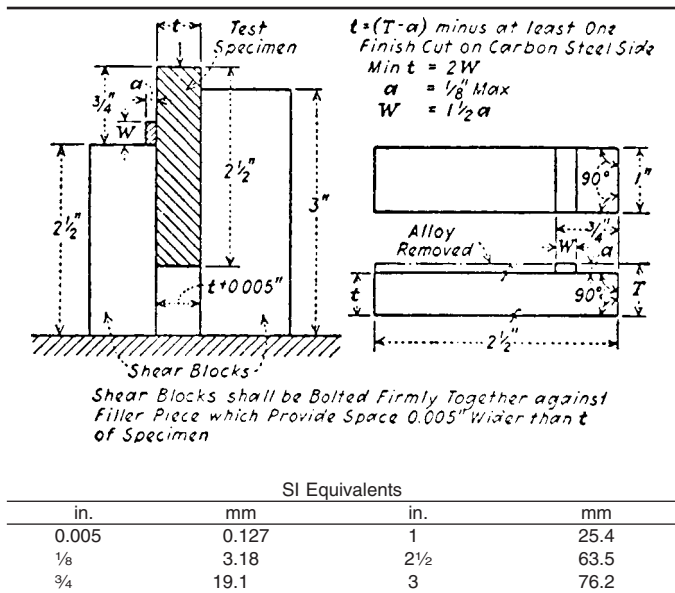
Test Specimen and Method of Making Shear Test of Clad Plate
